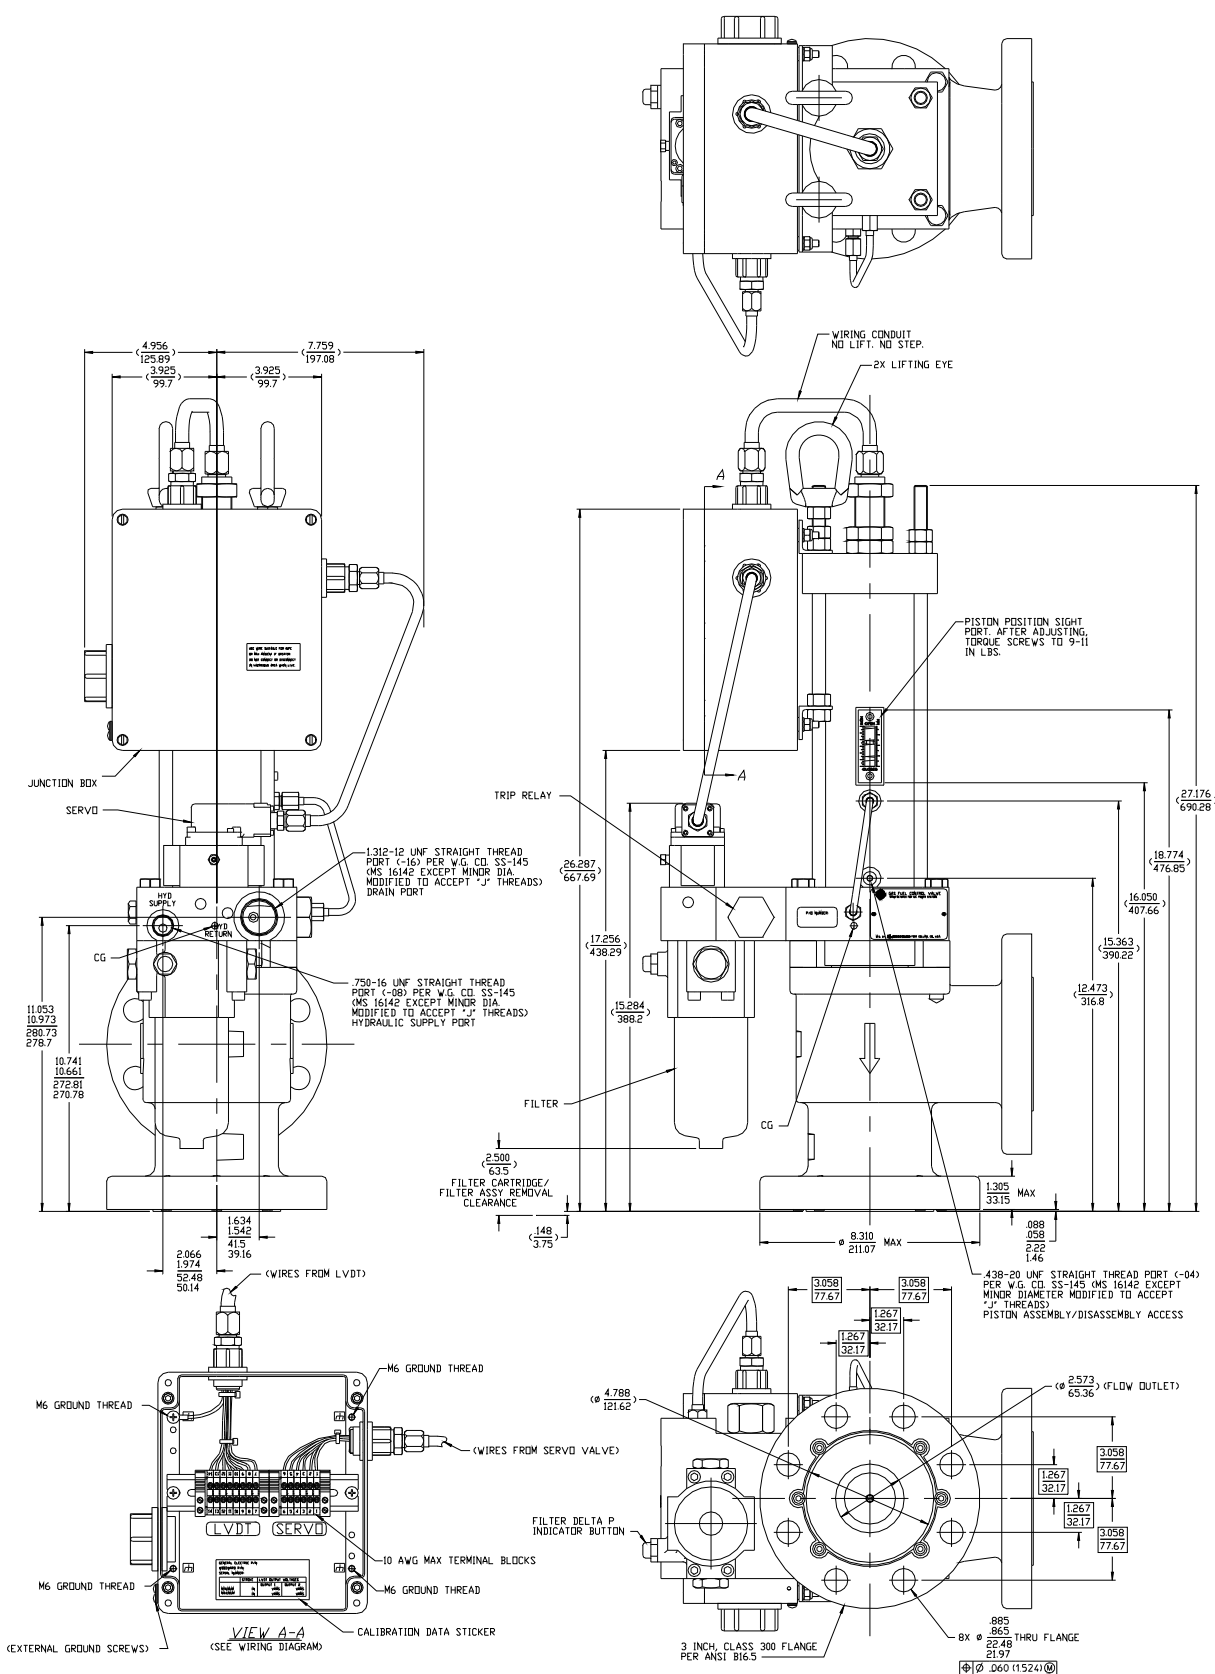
Outline Drawing 2" Standard Recovery Control Valve
